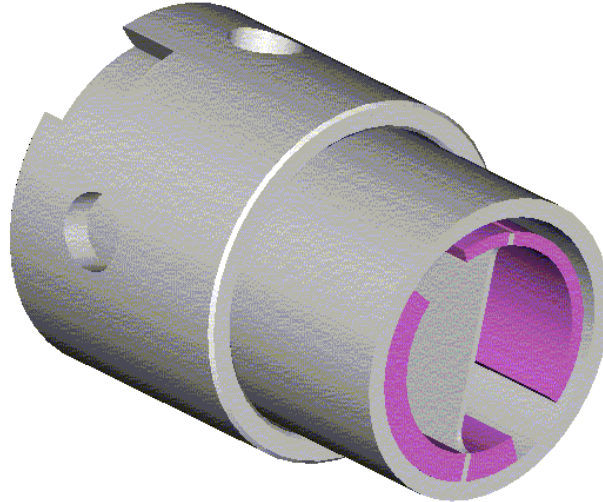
flex pivot mounted in protection sleeve (note holes for adhesive- this allows glue to be added after assembly and reduces risk of adhesive being placed on moving parts)
